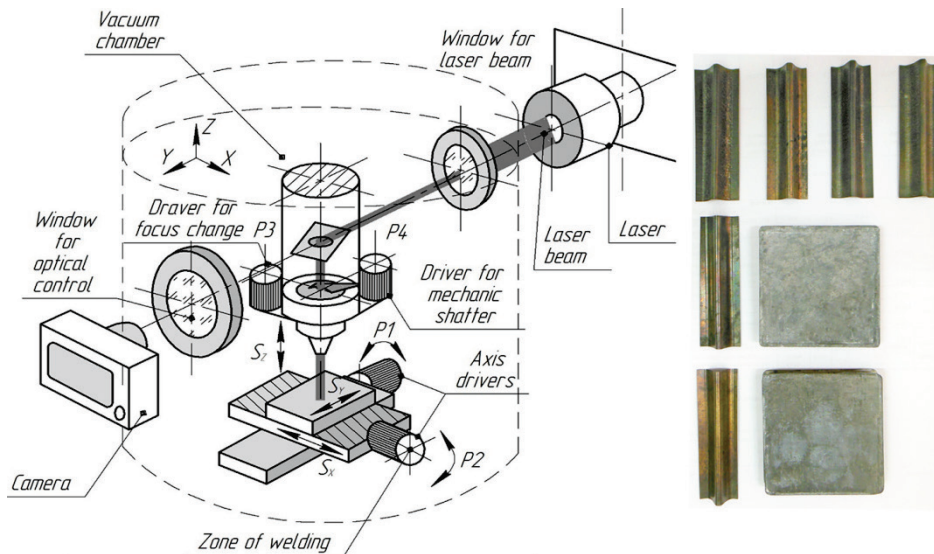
The equipment used and the scheme of the beam exposure to the surface and parts of workpieces.
